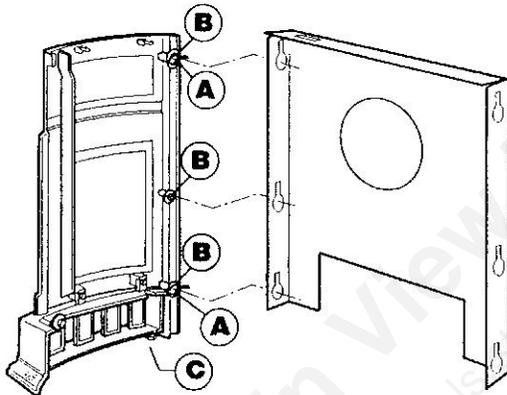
Fasten the Left Side to the Rear Shroud.
